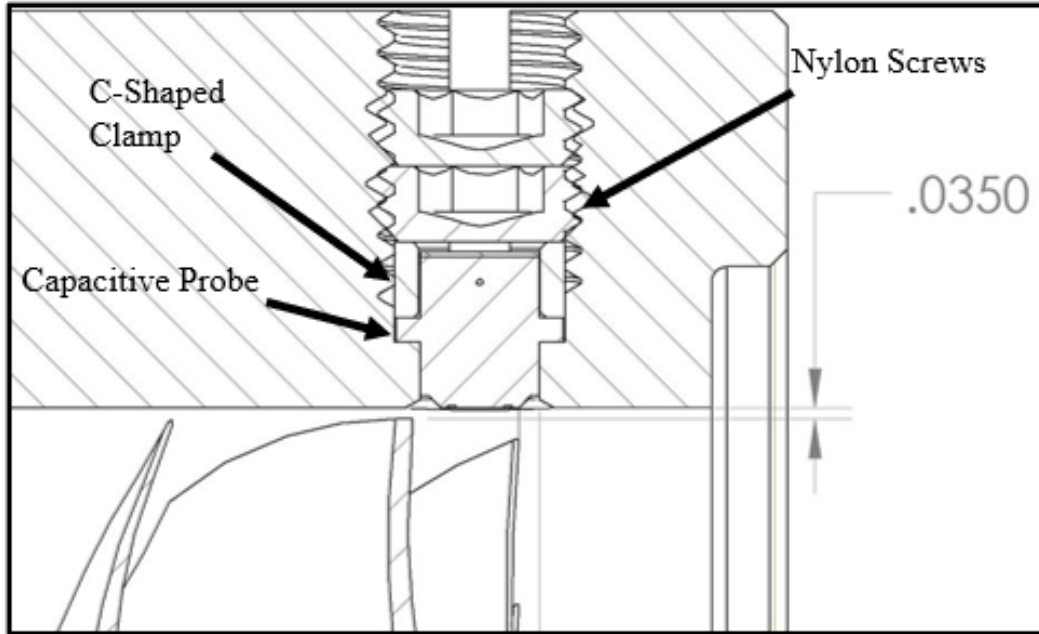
Cross Section View of Probe Mounted Into Port Showing Cold Tip Clearance.
